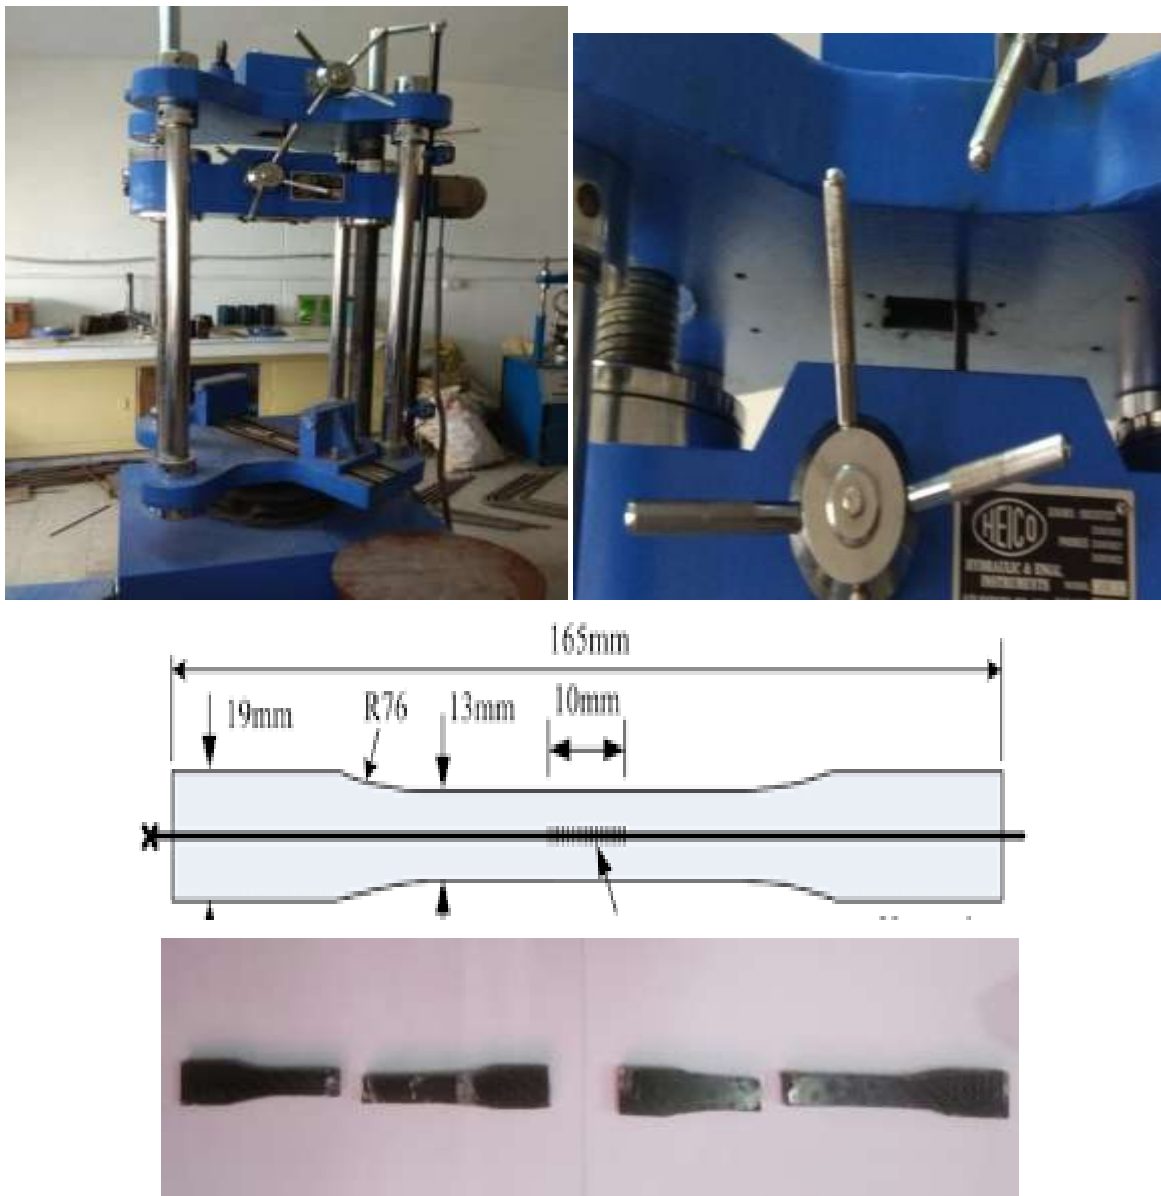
The images of (a) UTM (HEICO), (b) Dimension of standard specimen, (c) specimen after testing
